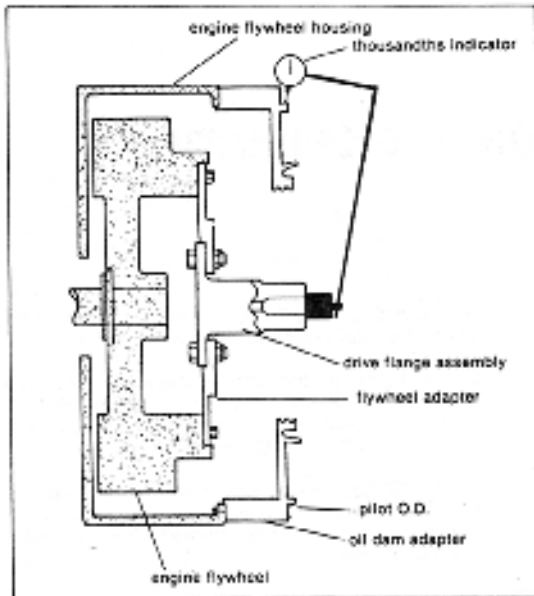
Dial Indicating Oil Dam Adapter Pilot O.D.
